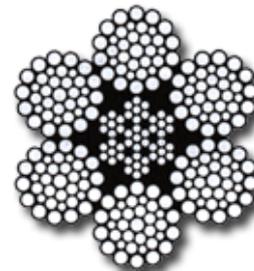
Cross section of rope sample used: 6×36 Warrington-Seale with IWRC [2]
